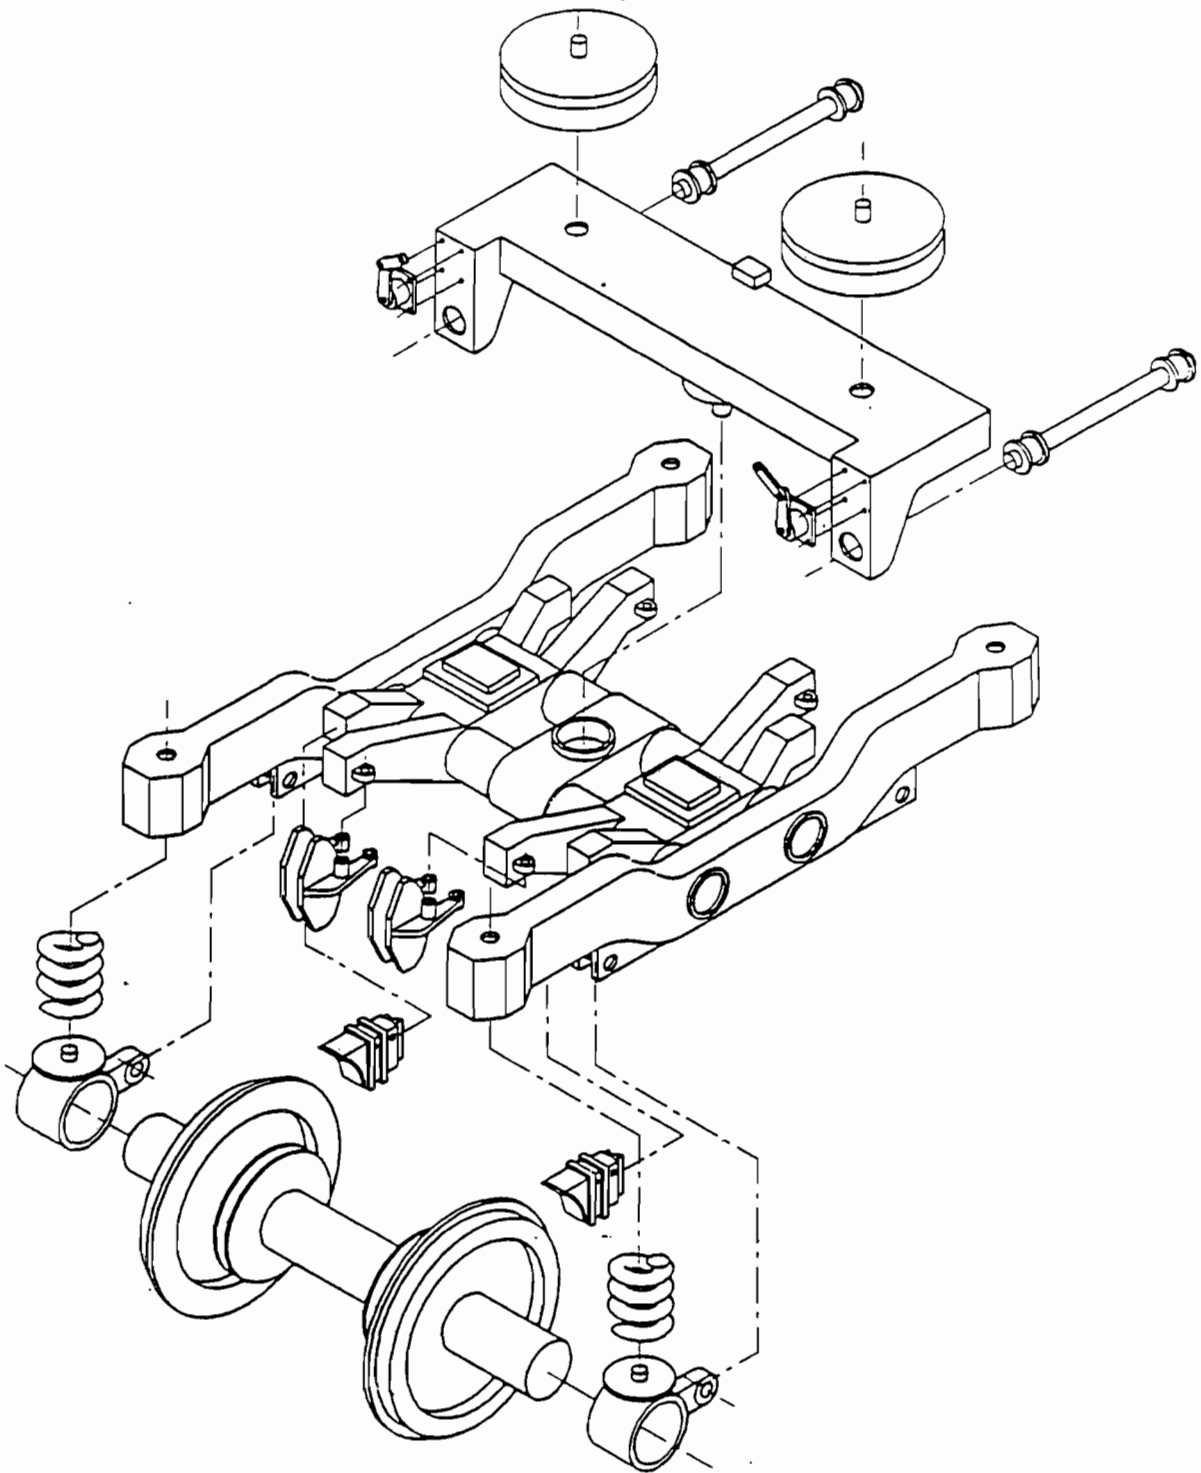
Kawasaki Truck for Kawasaki Bi-Level for MBTA - Exploded View
